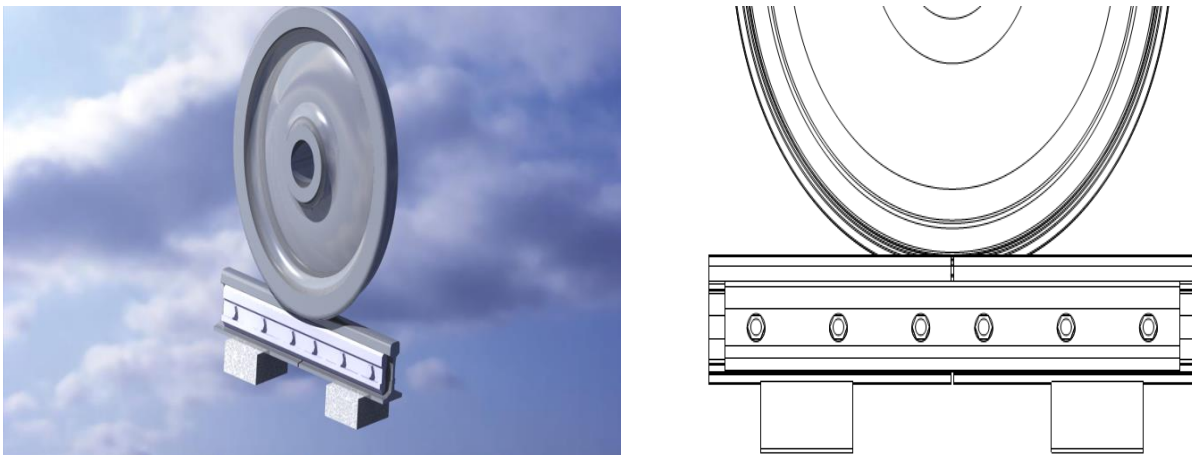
wheel, rail, joint, and M22 bolt model.
